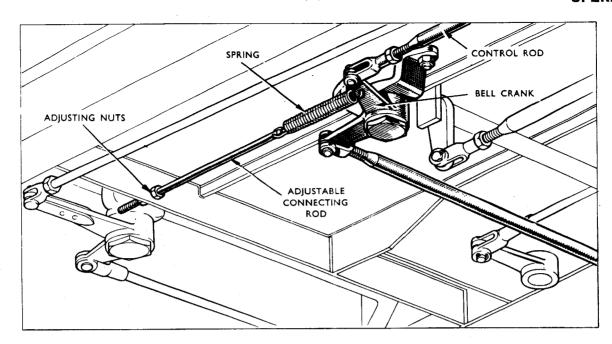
Spring maintaining partial engagement of Rear Drum Clutch.
